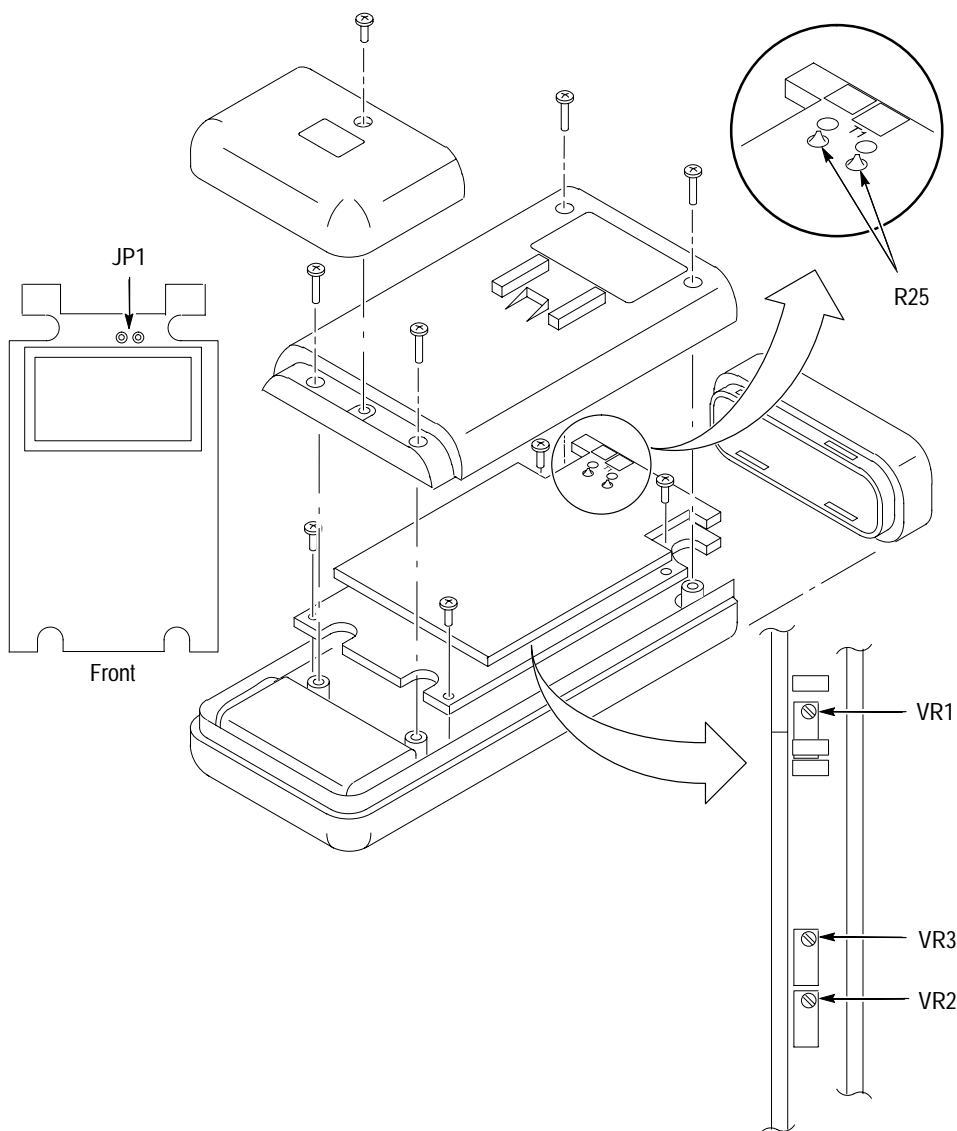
DTM920 Thermometer disassembly, test points, and adjustment locations
